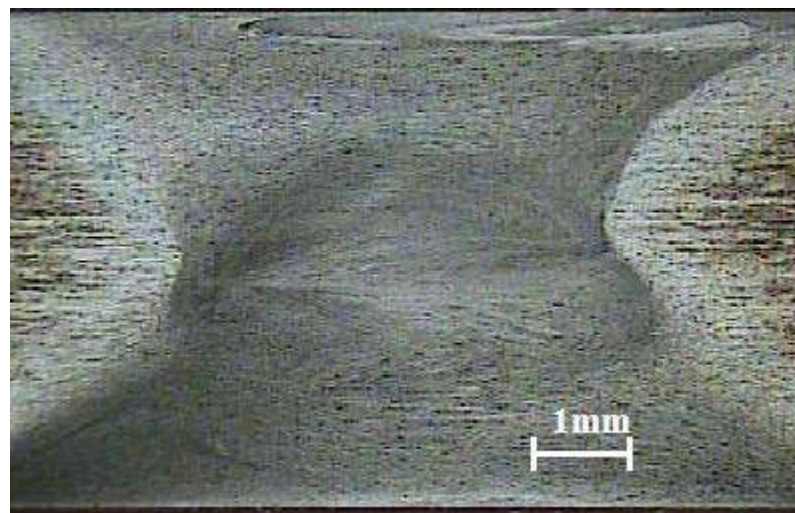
Macrostructure of welded specimen welded with 0.5 mm pin interference and opposite direction of rotational speed
